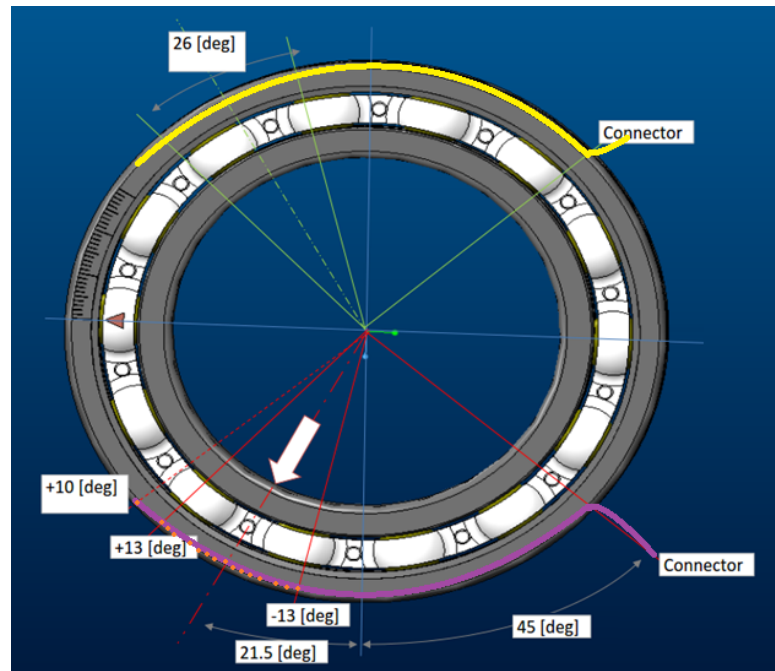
Bearing equipped with FBG sensors in the outer ring, used to obtain the measurement data
